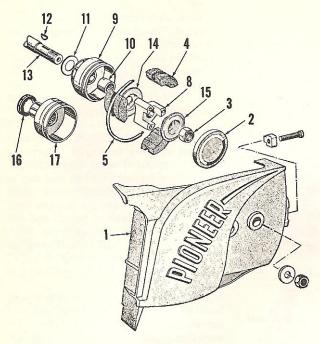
Exploded view of clutch used on late models. Clutch is also service replacement for early models. Some models are equipped with floating sprocket (16).
